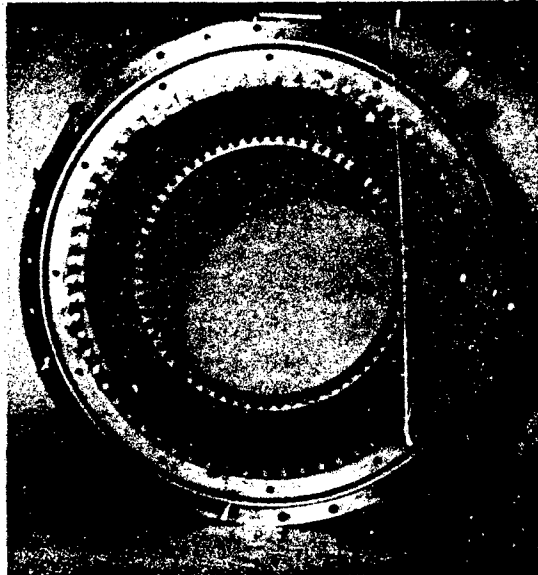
Build I, Full Rear View of First Nozzle Assembly (XPN-18126)
